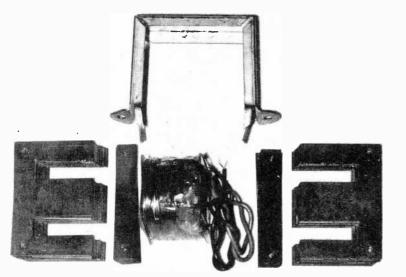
Transformer T1 can be made by modifying a readily available model. This shows the parts of the transformer disassembled and ready for re-winding.
